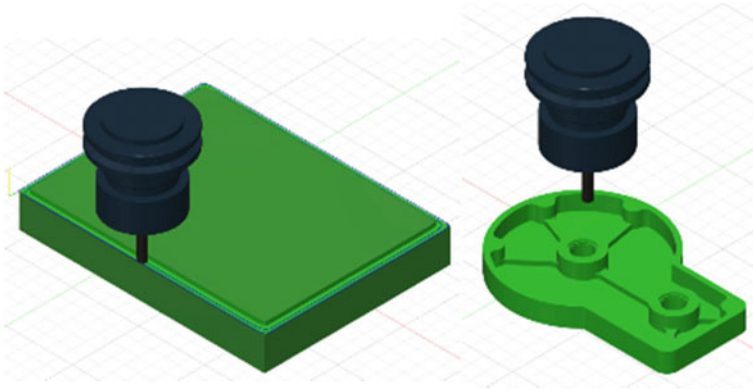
Part manufacturing using CAM tools—milling operation with tool and tool holder (in black color), raw part on the left side and finished part on the right side, both in green color
